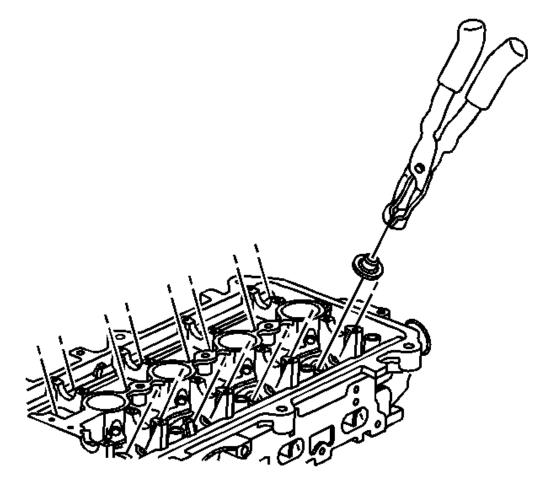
View Of J 36017 & Valve Seal Courtesy of GENERAL MOTORS CORP.
